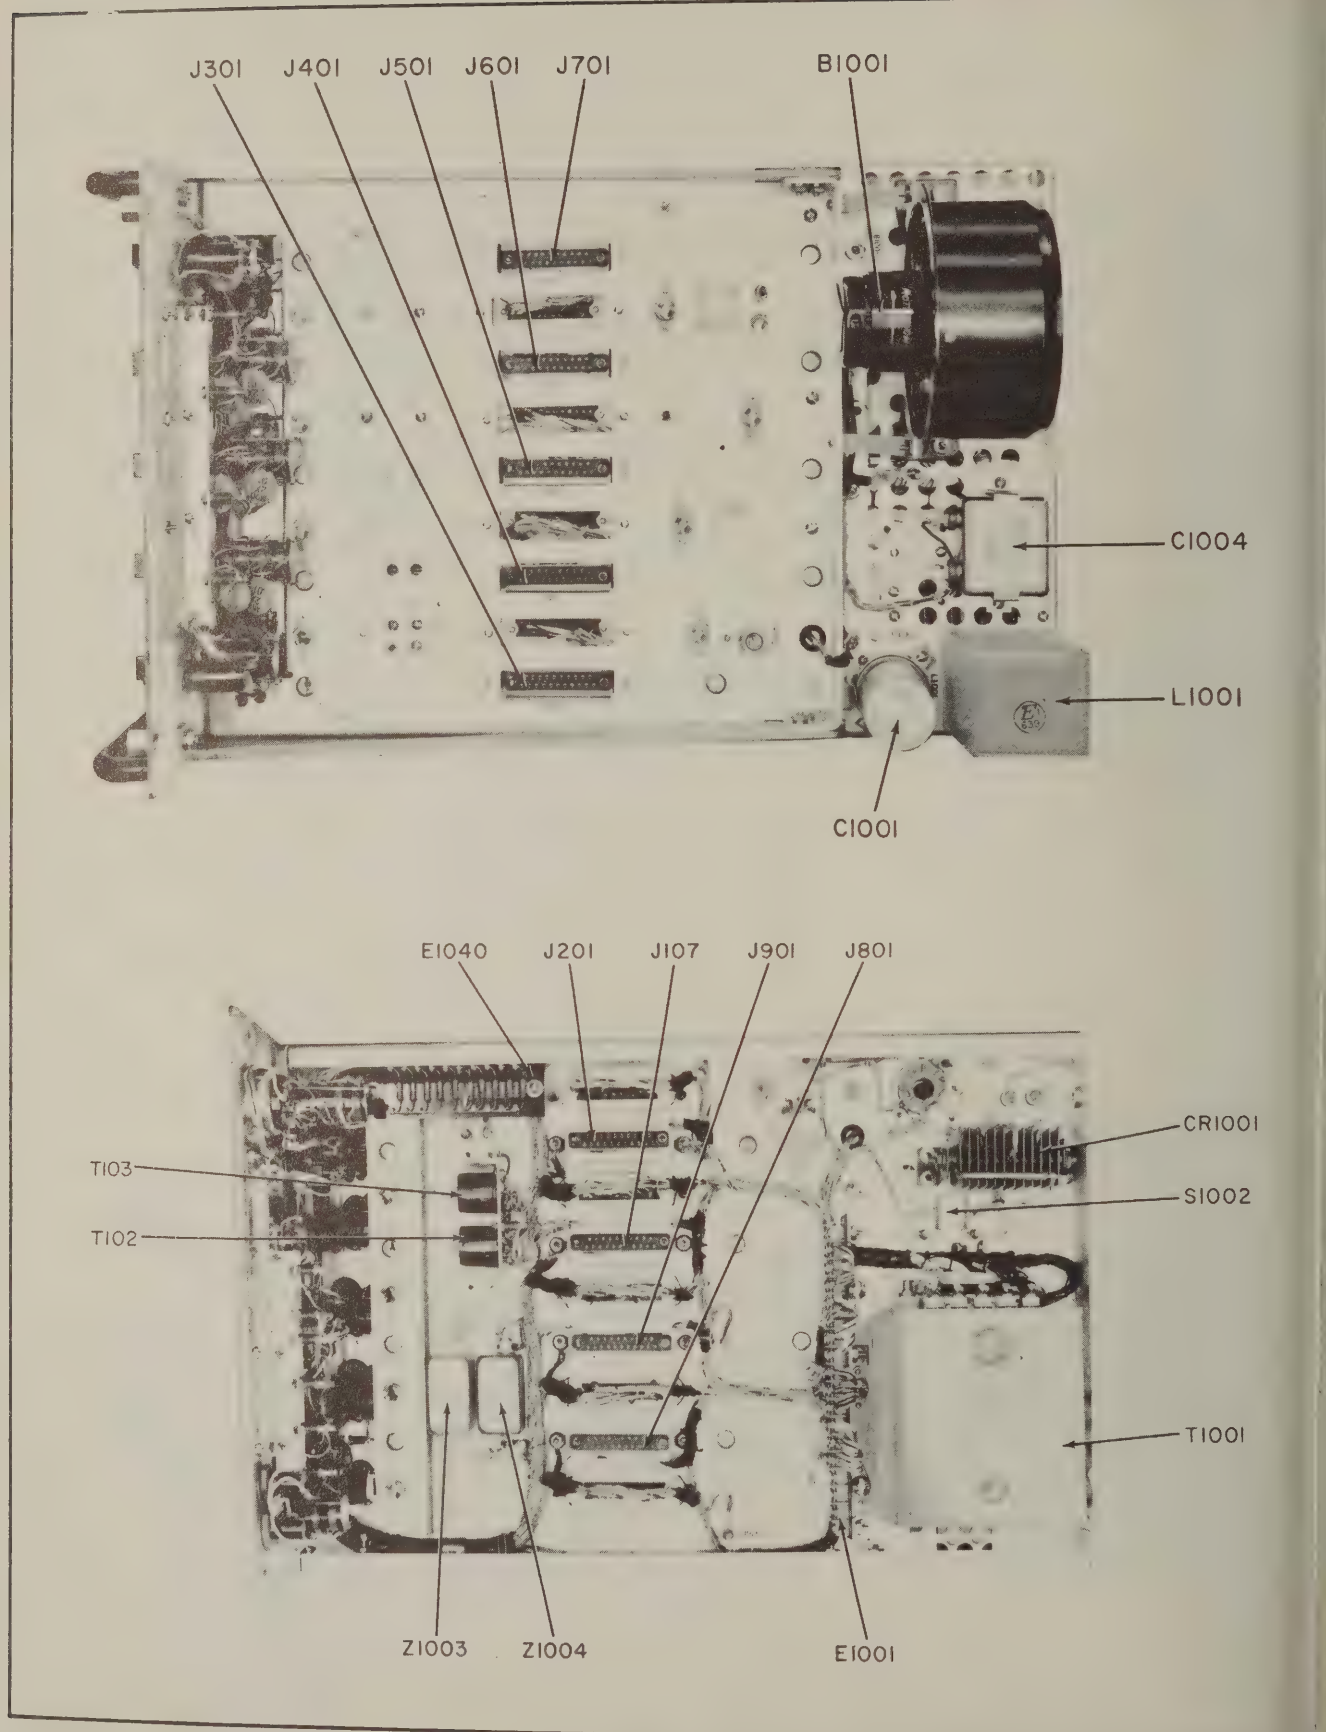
B. Top and Bottom Chassis Views, Sub-Assemblies Removed, TS-573A/UP
